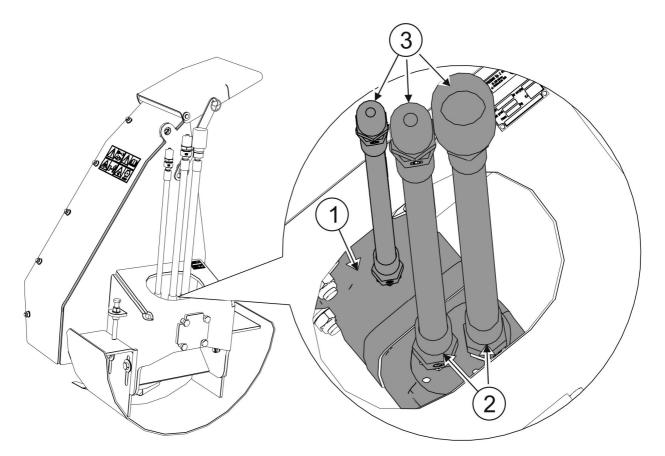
Inspect connections of quick couplers of the hydraulic motor's hydraulic lines.
